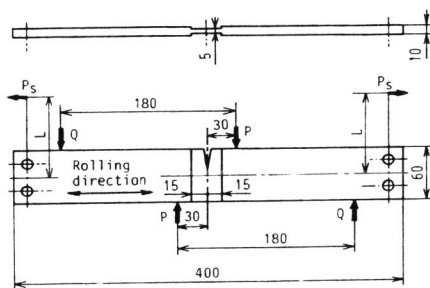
Four-point shear specimen. Dimensions are shown in mm.
